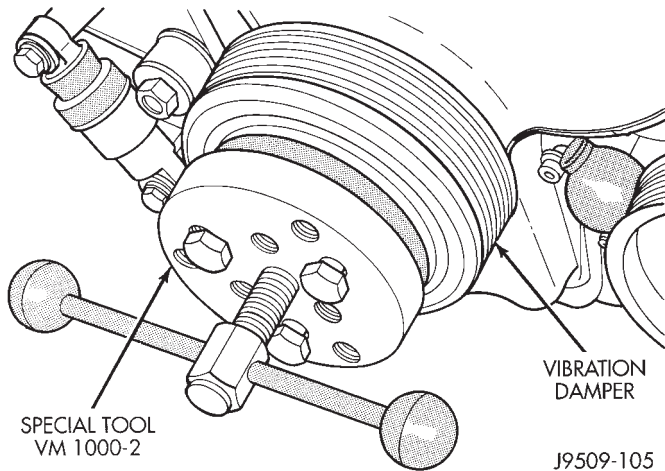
Vibration Damper Removal With Tool VM-1000-2
